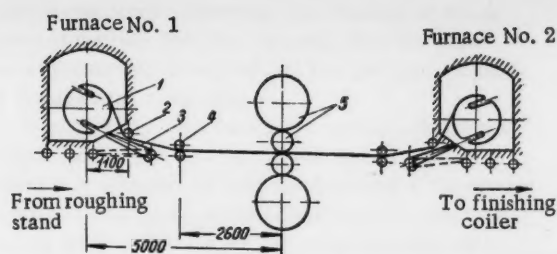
Layout of the finishing stand and reheating furnaces with coilers: 1) Coiler drum; 2) guiding roller; 3) guide; 4) pulling rollers; 5) working and back-up rolls.
